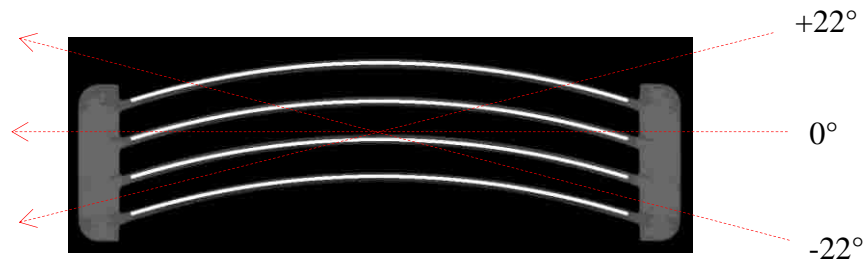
Diagram showing the projection acquisition direction for AFIP-7 fuel assembly.
